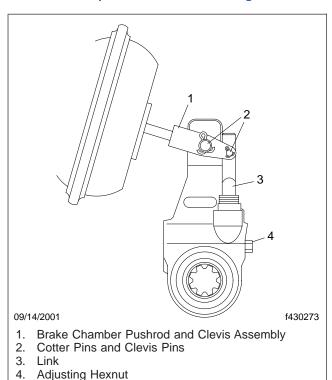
, Slack Adjuster (attached to welded clevis)
